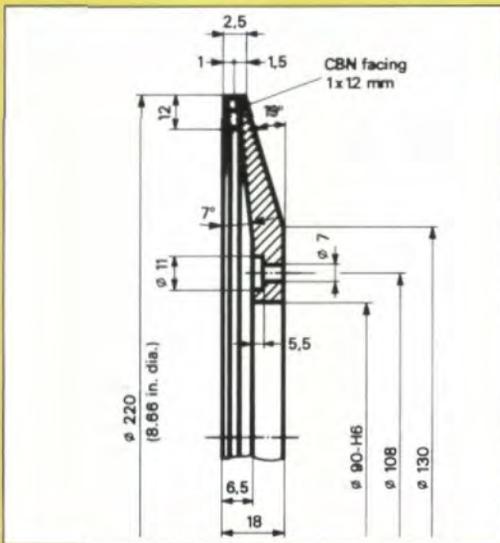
CBN saucer shaped wheel for shaving cutter sharpening.
